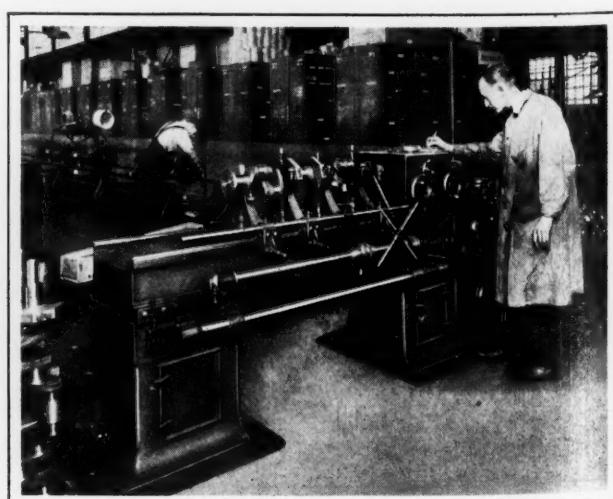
Inspecting the Balance of Crankshafts
